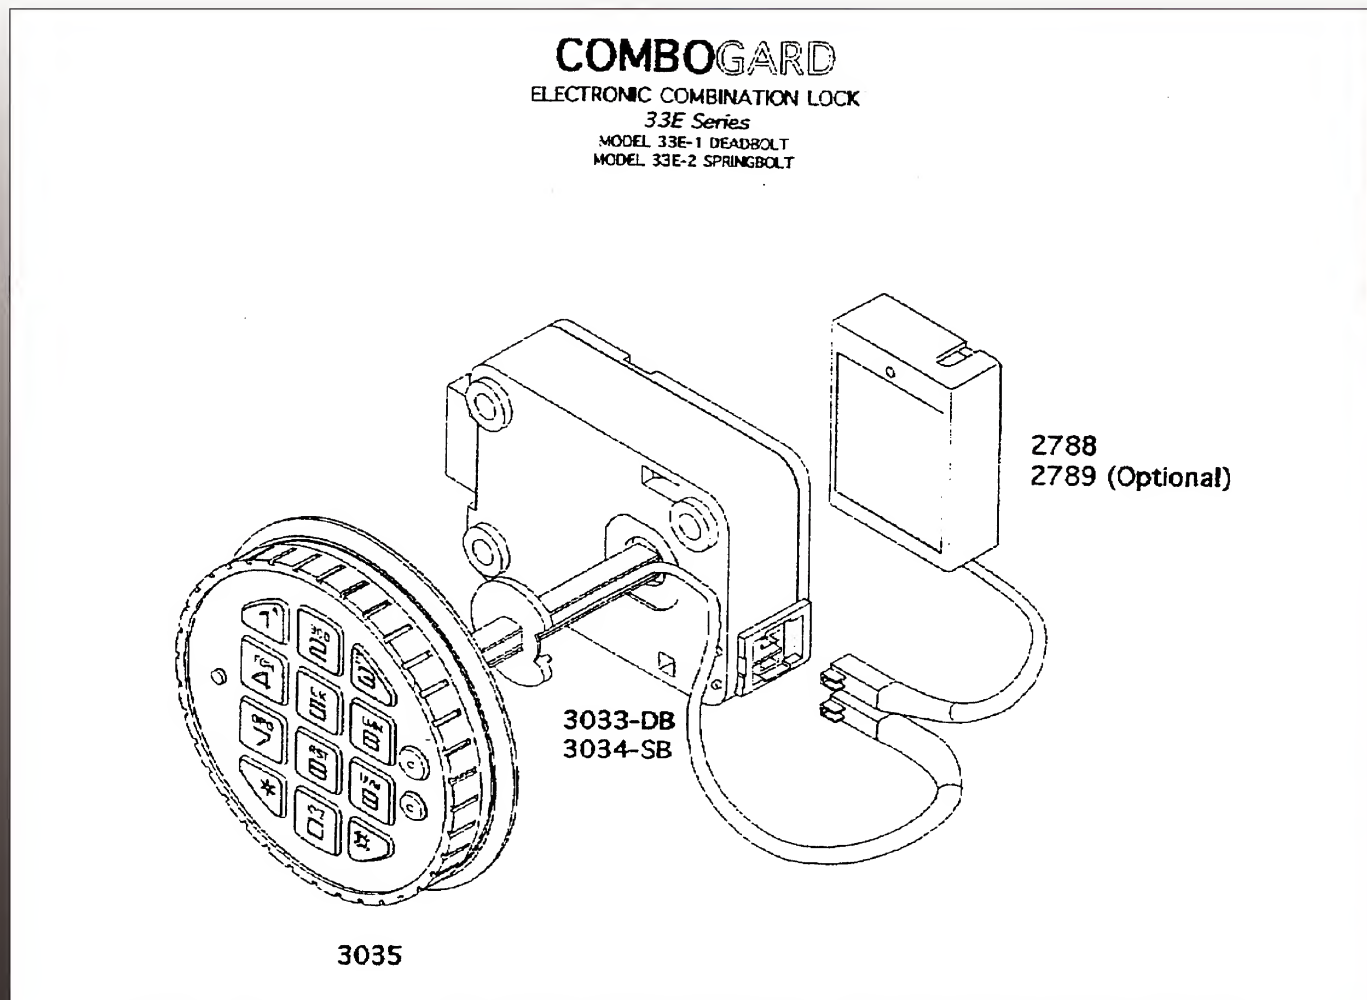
Illustration A. The channel cut in the spindle is for the wire run between the dial and lock body.
